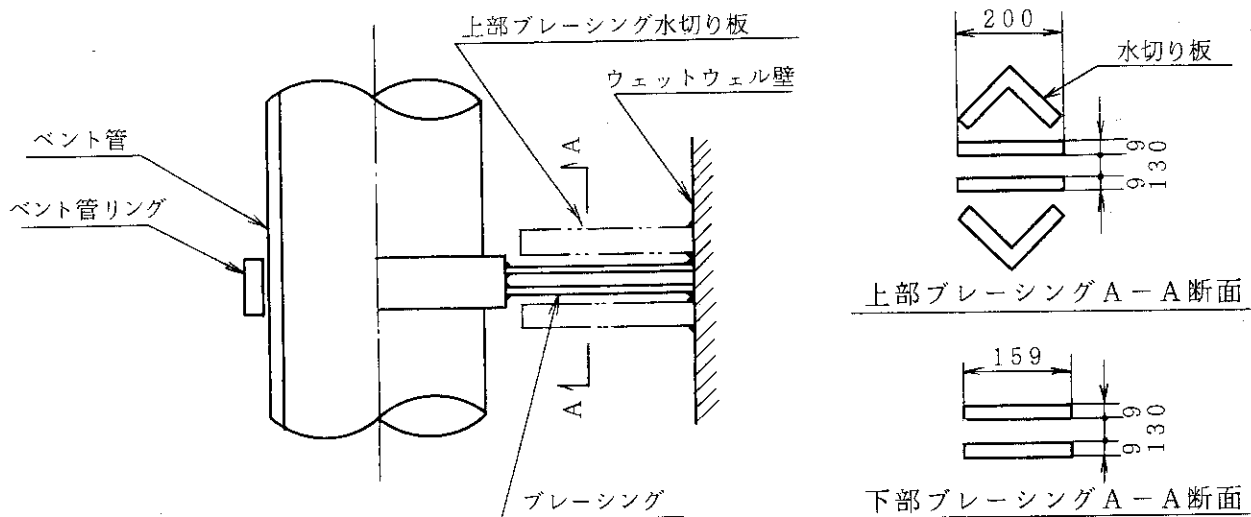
Structure of braces connecting vent pipe and wetwell wall (as of after modifications)
